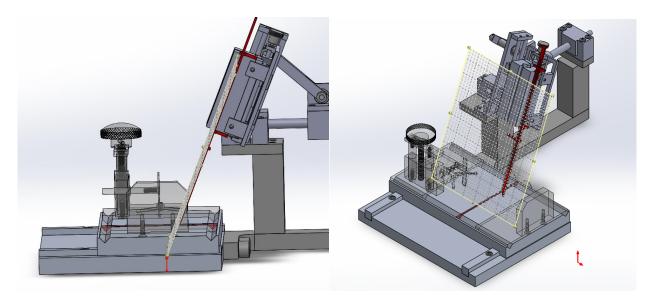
A: The plane of the F1 Length contacting the base coincides with center plane of shaft clamping mechanism.
